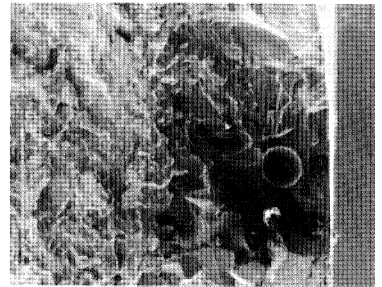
Fracture surface(13.5kWx5sec)
